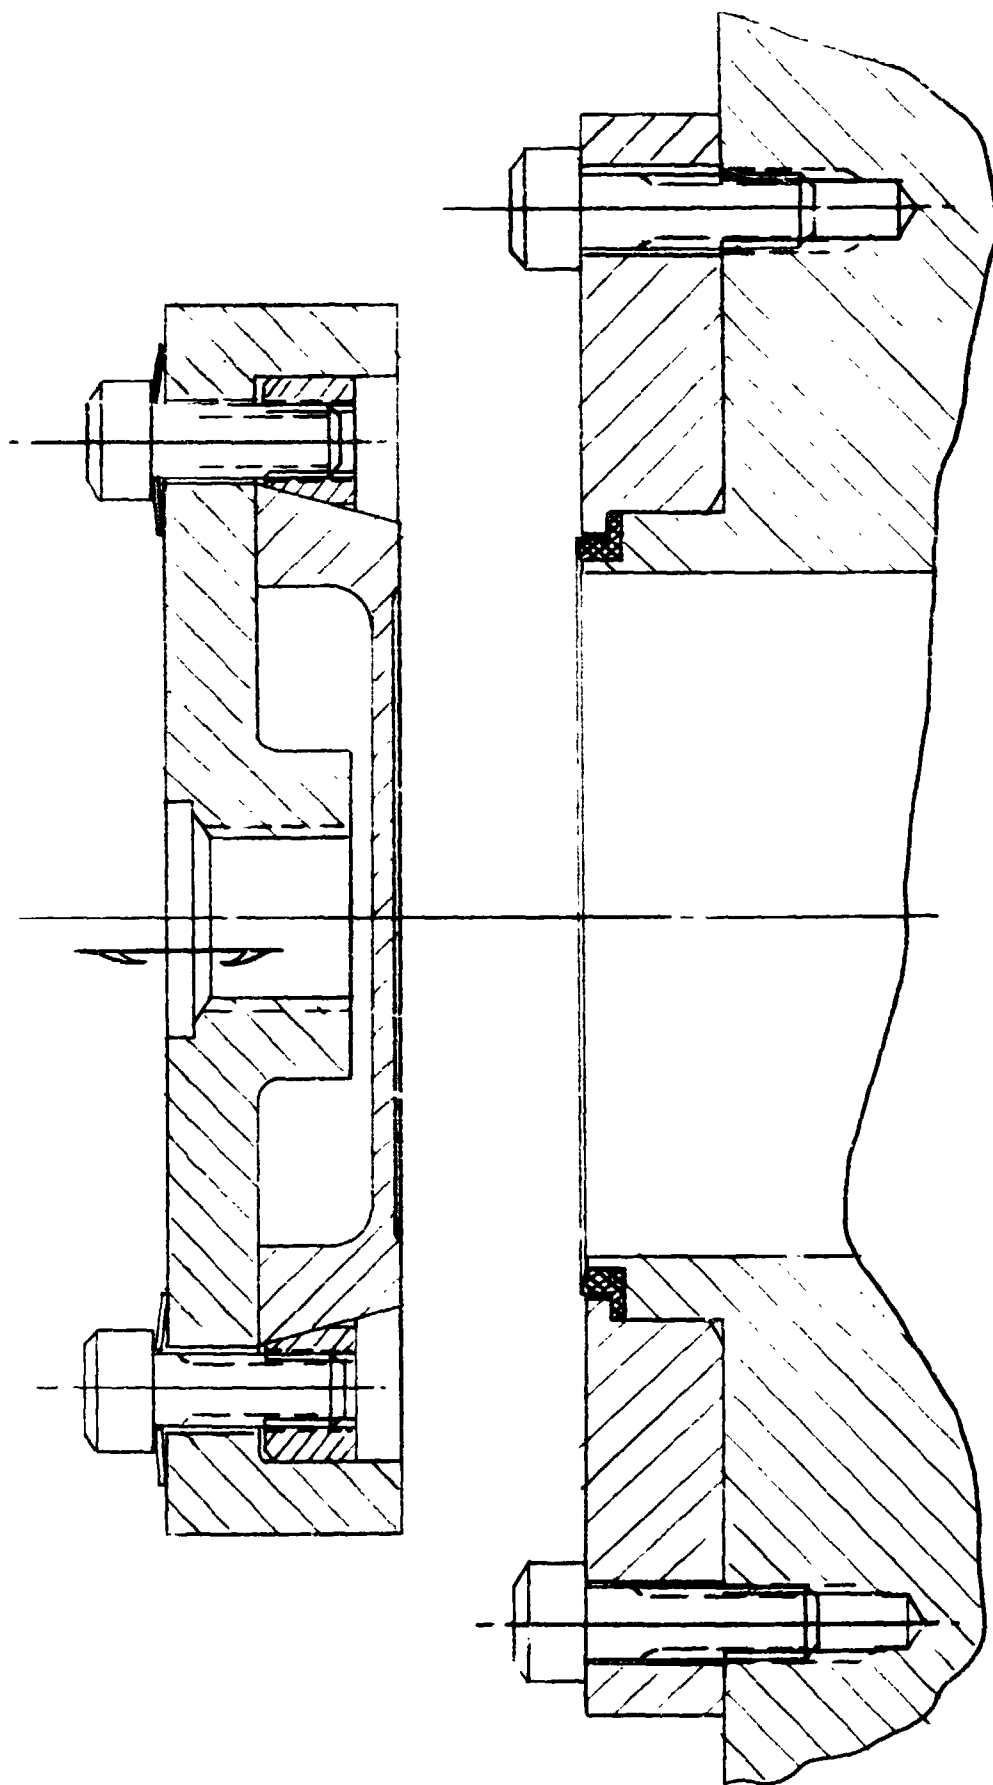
Flat Polyimide Seat, Drawing No. L4677
